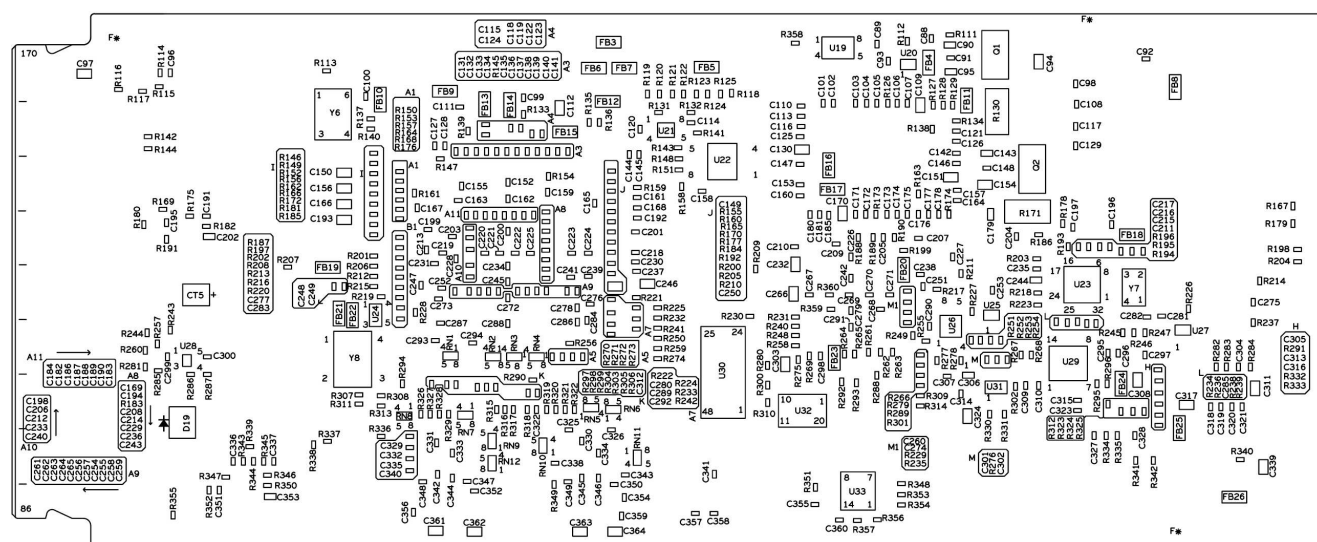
C6457 Lite EVM Board Assembly Layout – TOP view
